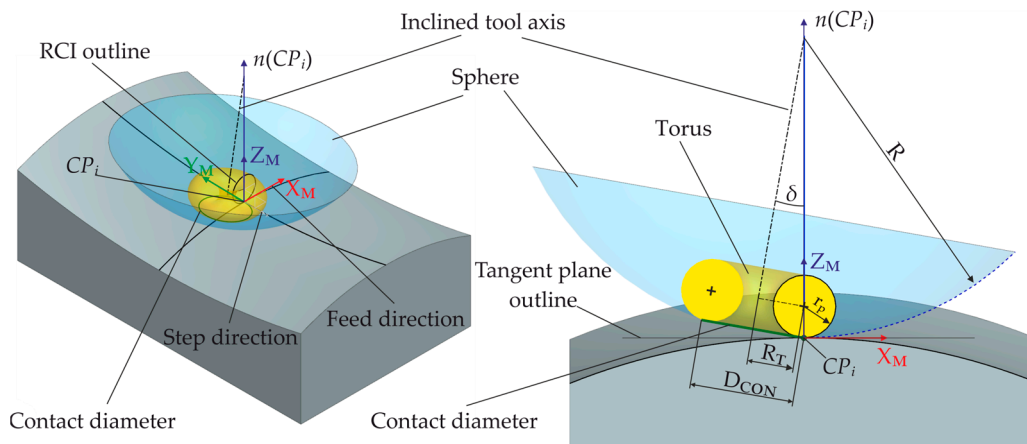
Method of detecting undercutting of the machined surface by the torus of the cutter.
